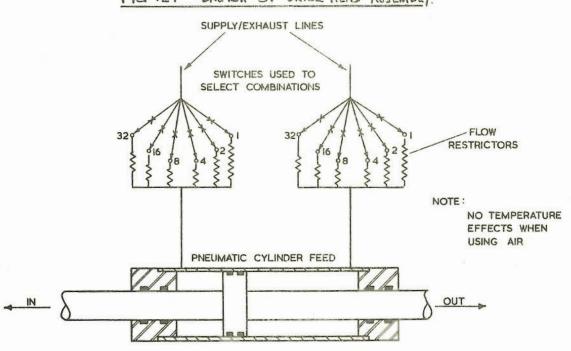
POSSIBLE ALTERNATIVE TO GEARBOX FEED.
